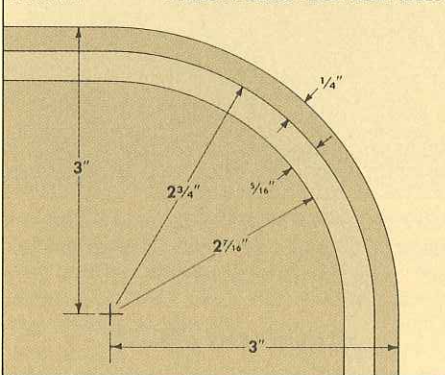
TAMBOUR GROOVE ON SIDE PIECES
